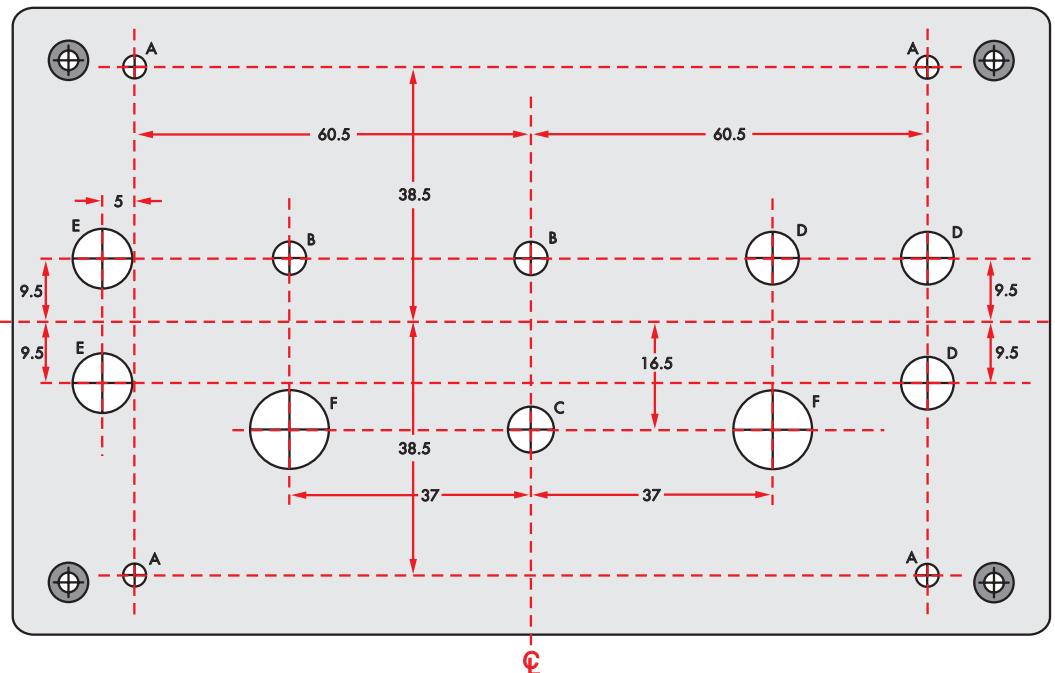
a 1:1 drilling template for the front panel of the specified UB1-size box.
